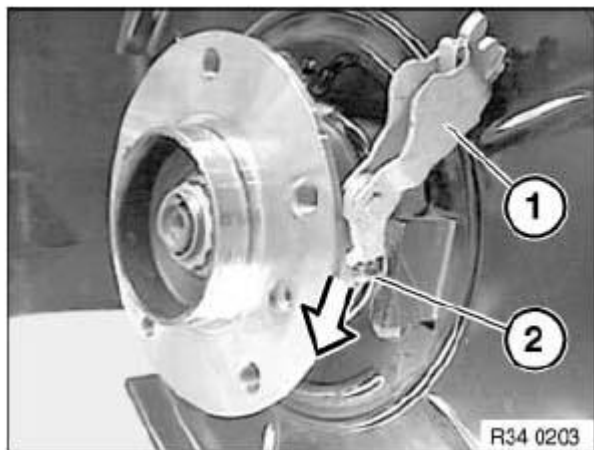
Identifying Expander Lock And Handbrake Bowden Cable
